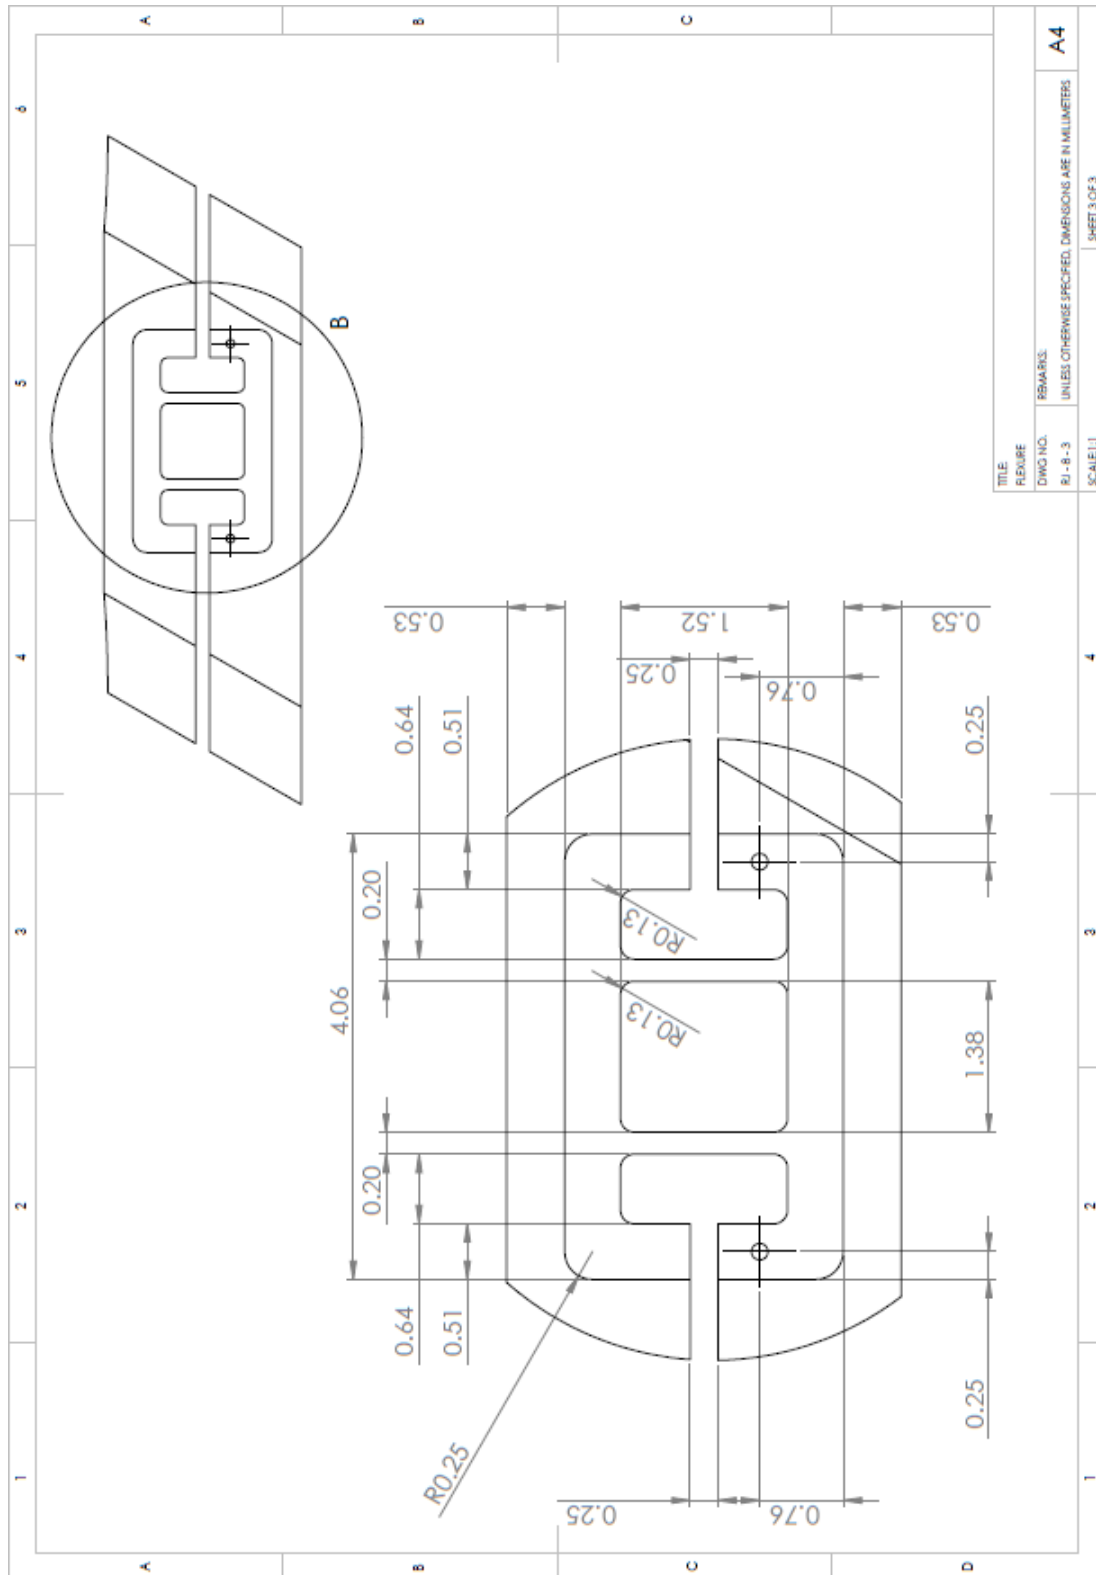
Part drawing: original flexure (RJ - 8 - 3). From [3].
